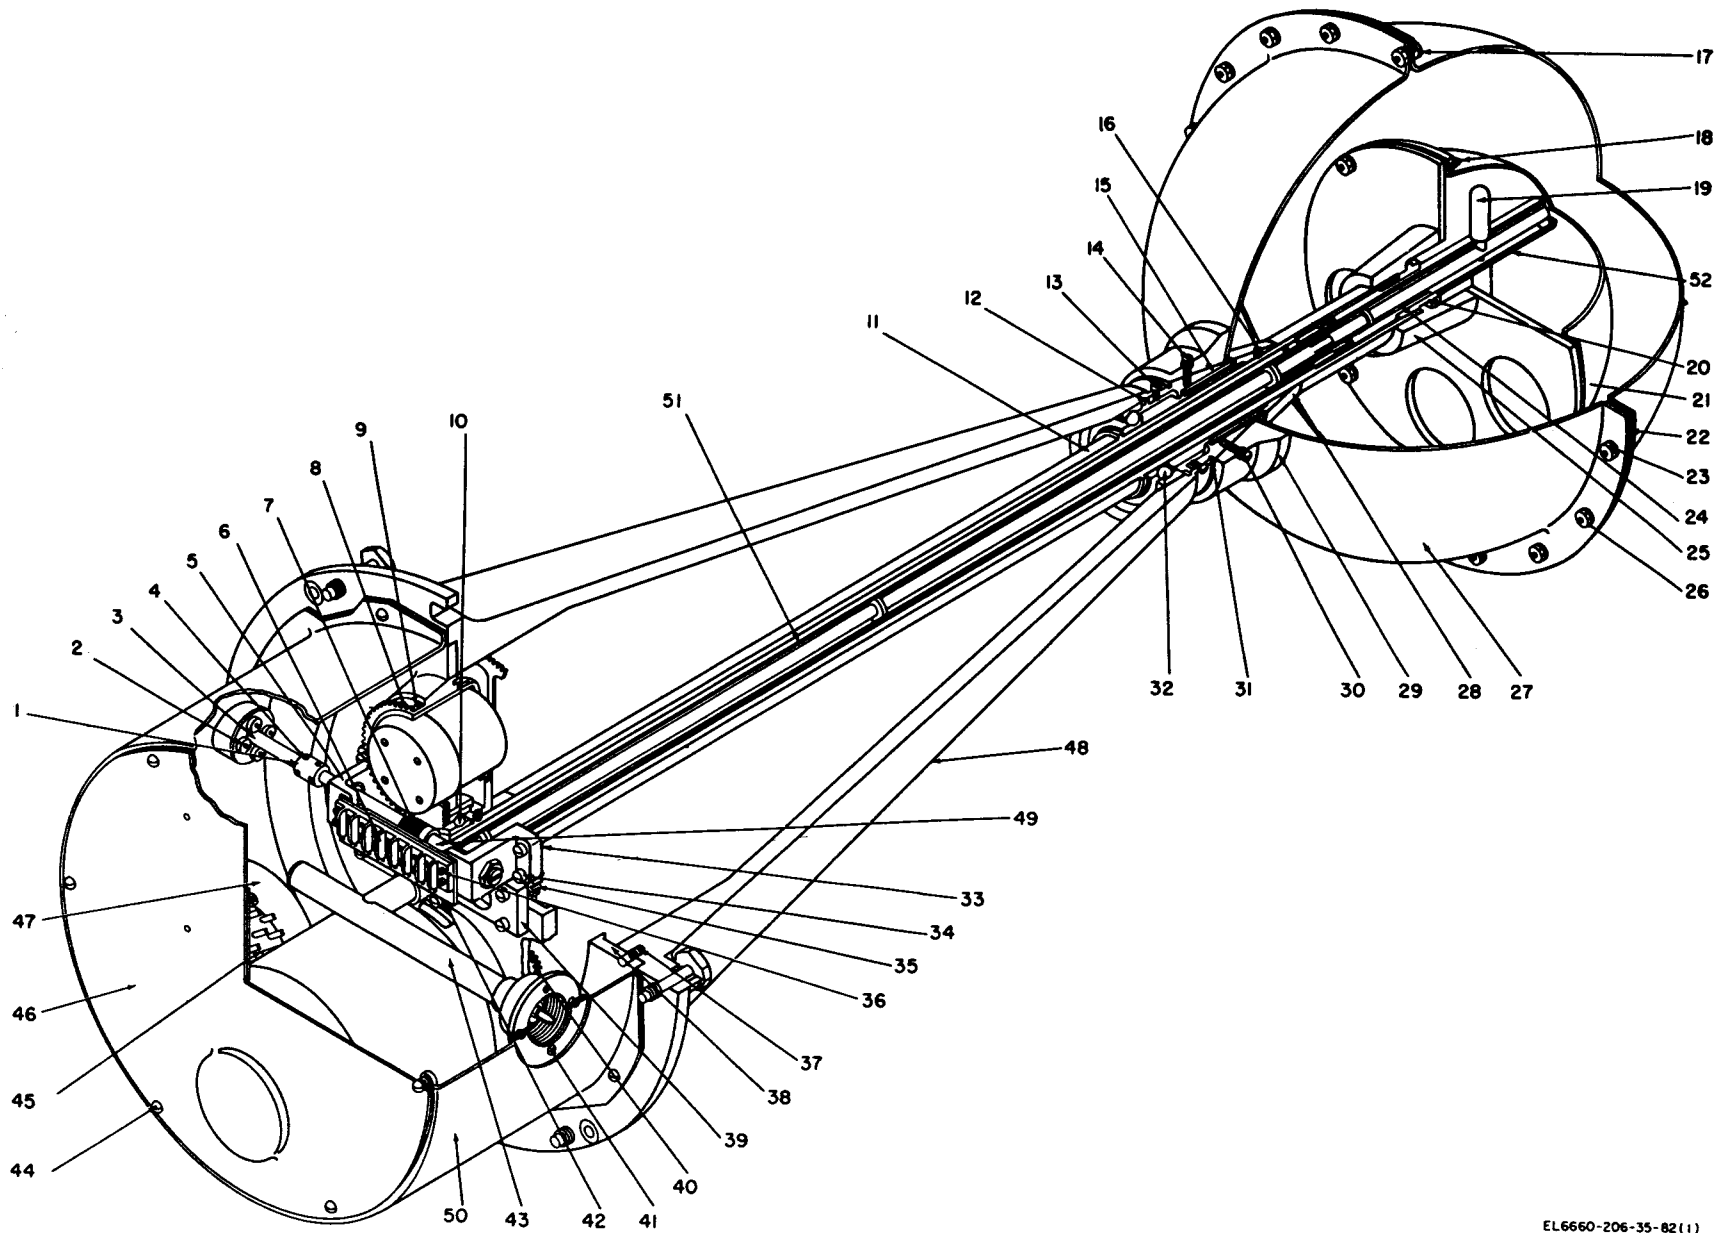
(1). Antenna scanner assembly, disassembly and reassembly (sheet 1 of 5).
